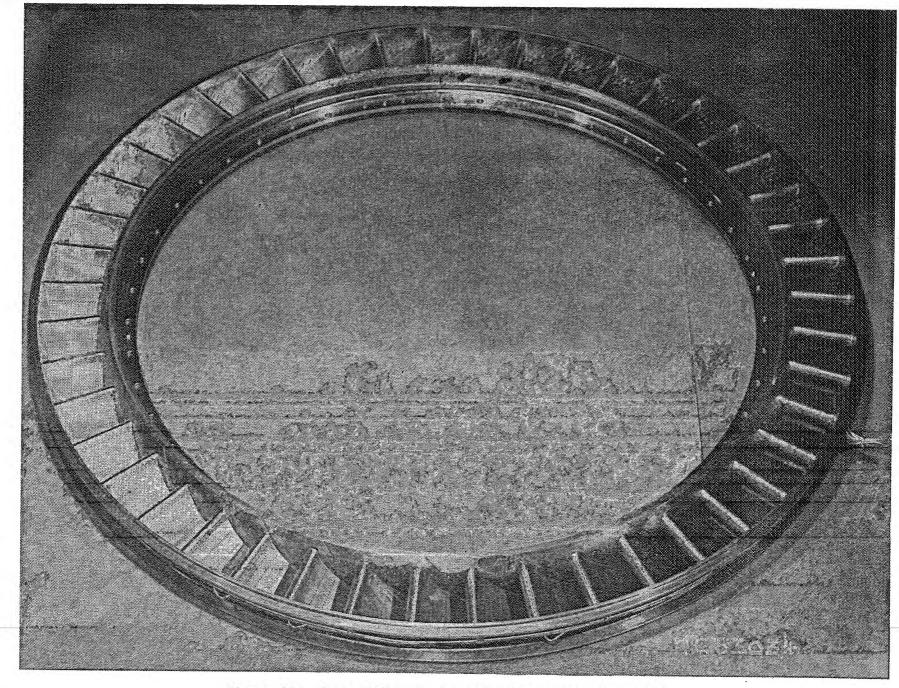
Stage 1 Nozzle Assembly (Forward Looking Aft)
